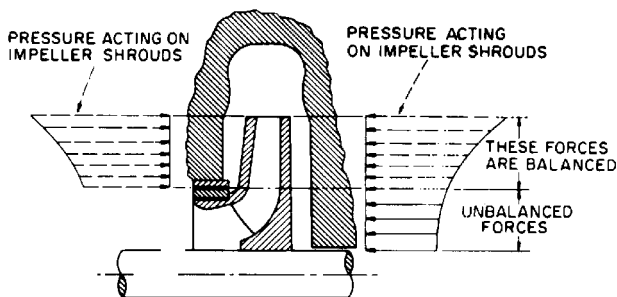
Pressure distribution on the front and back shrouds of the single-suction impeller with a shaft through the impeller eye
